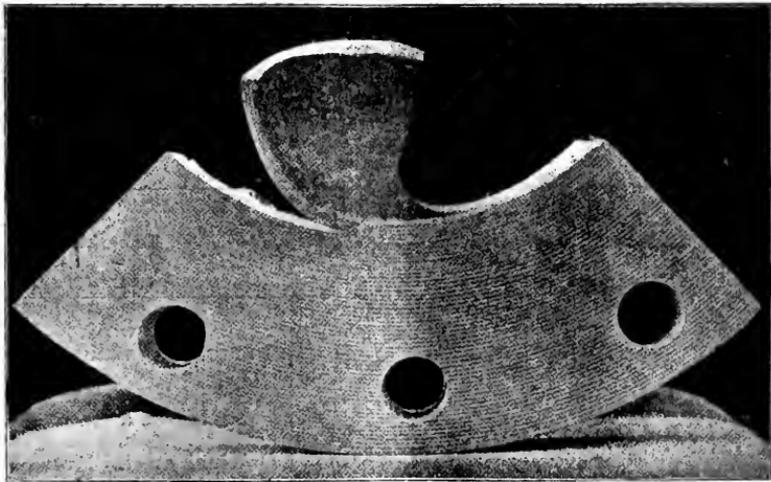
WELDED STEAM PIPE, SHOWING DEFECTIVE WELD.
